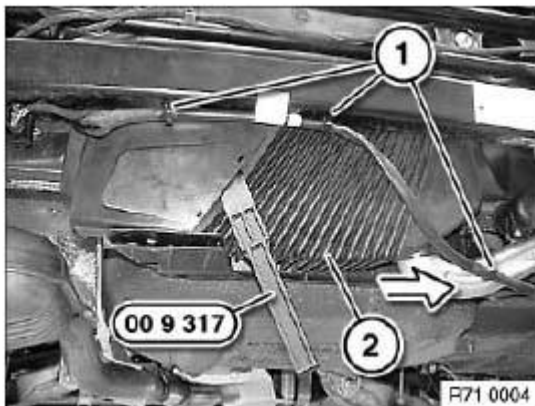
Removing Gaiter With Special Tool 00 9 317
